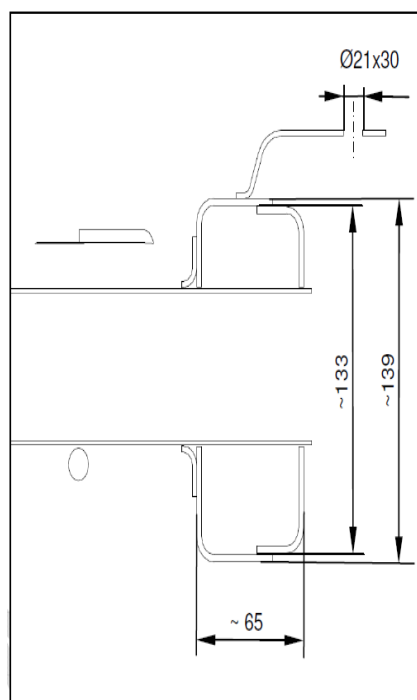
Section R-R (Amarok SC/DC)
